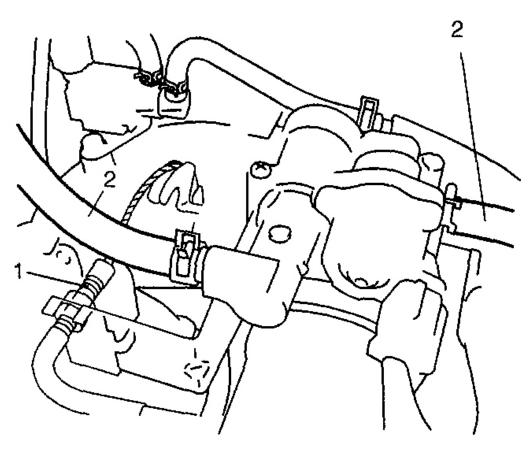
Disconnecting Accelerator Cable From Throttle Body Courtesy of SUZUKI OF AMERICA CORP.
